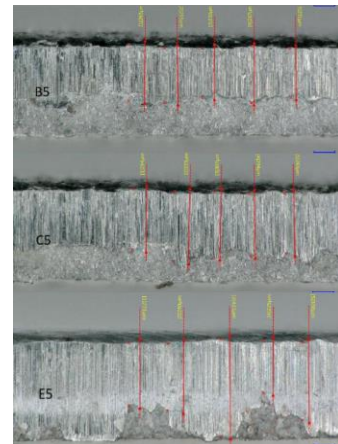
Sheared surfaces of investigated materials at 5% shear gap
